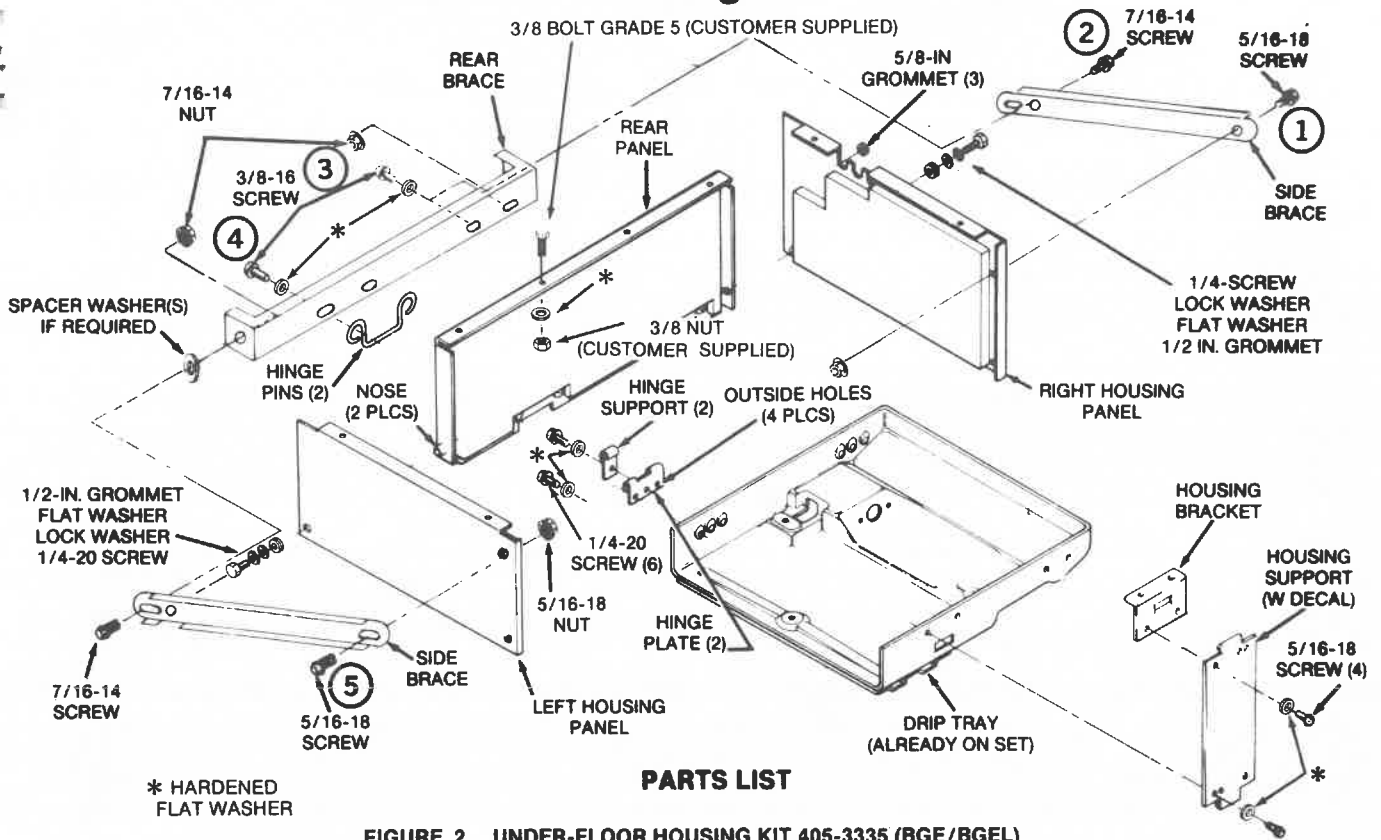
UNDER-FLOOR HOUSING KIT 405-3335 (BGE/BGEL)
